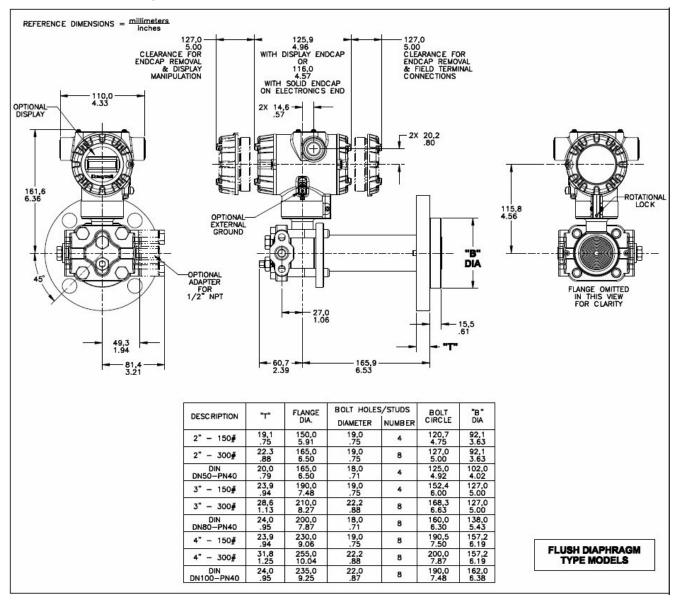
Typical mounting dimensions for flush diaphragm type models STF828 and STF832.
